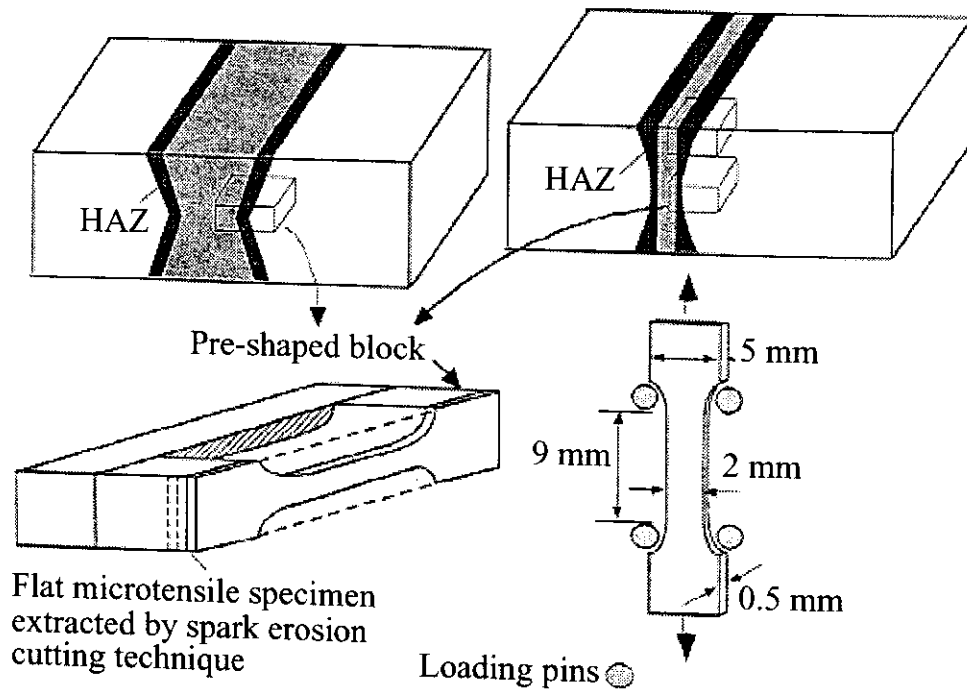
Micro-flat tensile specimen extracted from weld.
